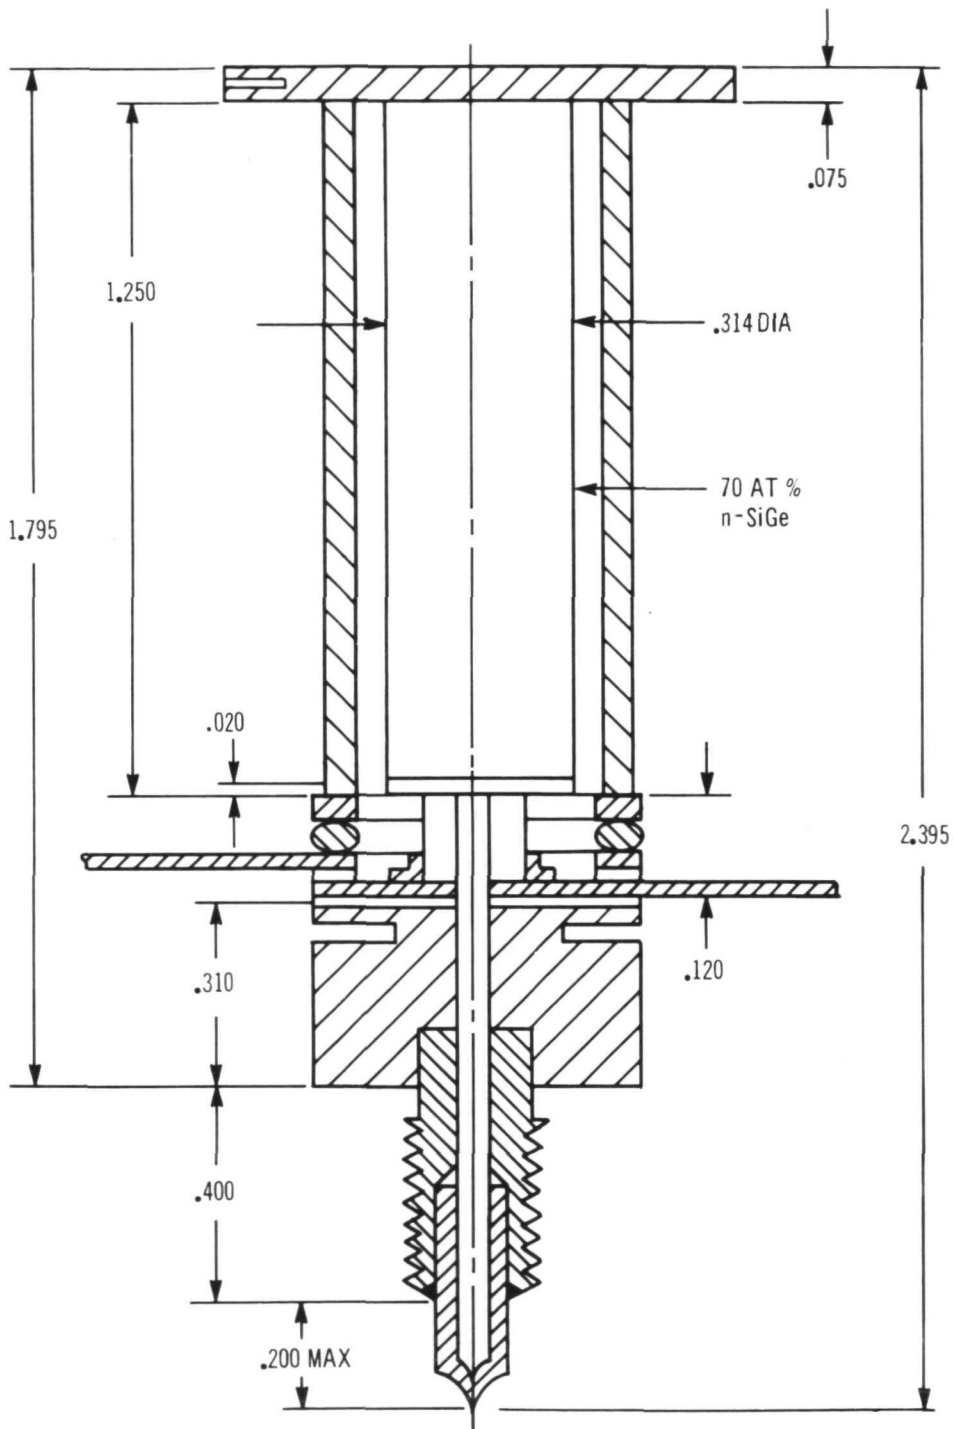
Hybrid Thermo couple Assembly - Design BX-1
